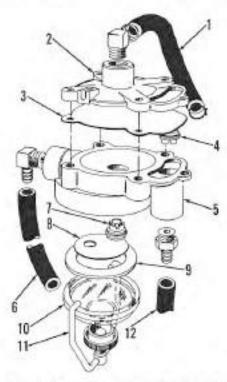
Exploded view of diaphragm type fuel pump, Refer also to Fig. Mc53.
